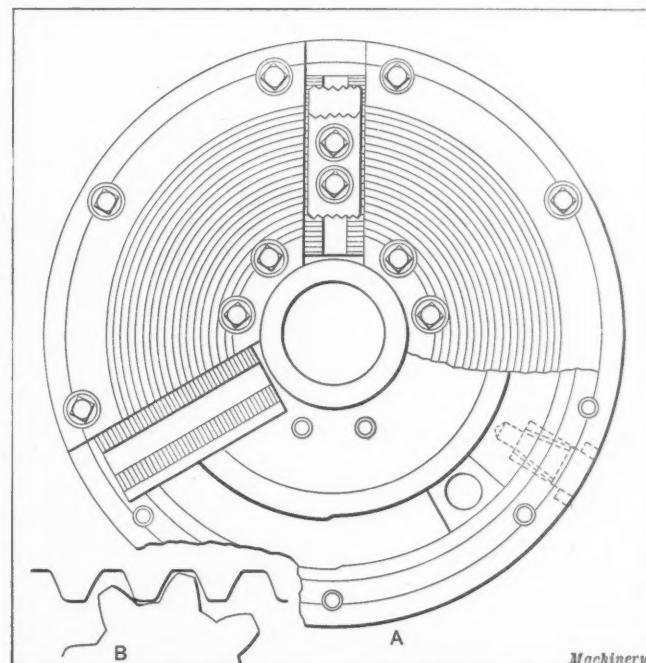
Concentric Chuck with Cam Ring instead of Scroll
